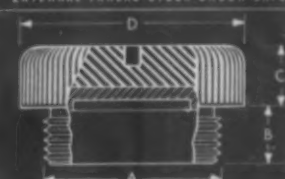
DIMENSIONS	Thread Size "A"	Length of Thread "B"	Height of Cap "C"	diam. of Cap "D"	diam. of Cap "E"
